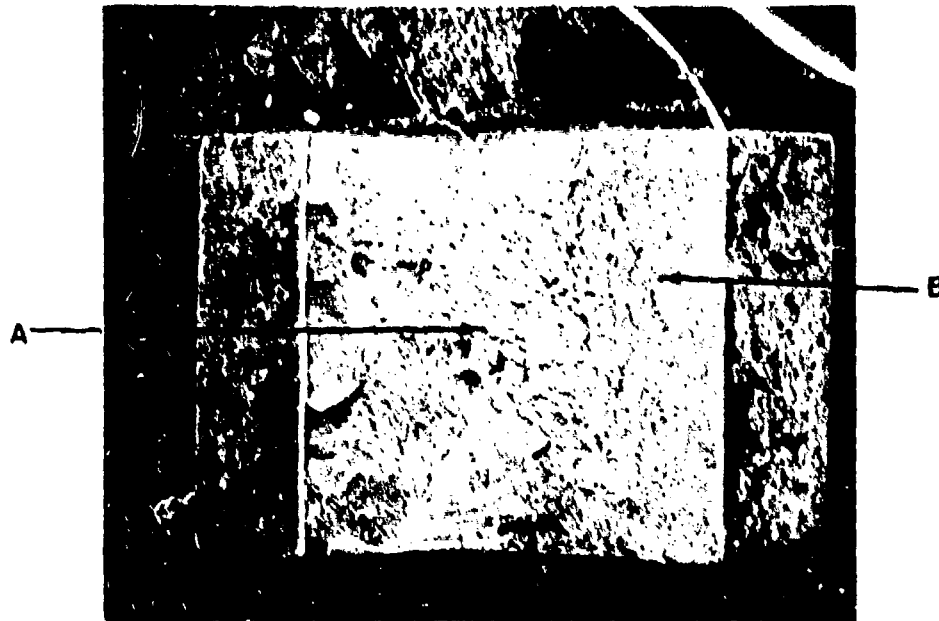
Fatigue fracture surface of a hydrogen-embrittled A-514 weld specimen, 10x.
